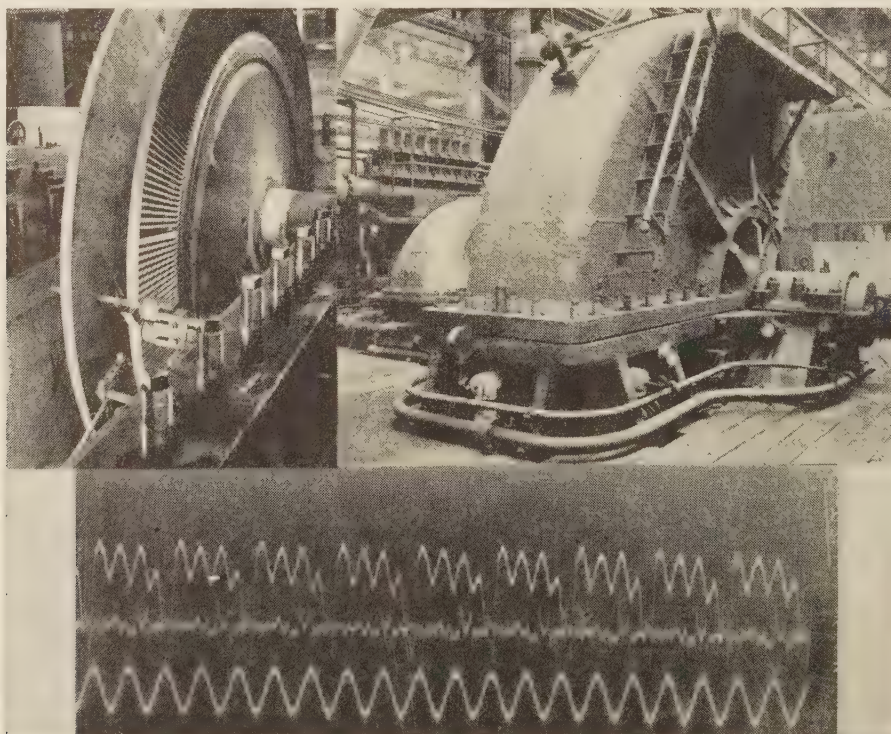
WHEEL VIBRATION TESTING MACHINE WITH TYPICAL OSCILLOGRAPH RECORD OF TESTS
